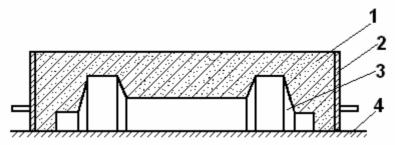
Manufacturing of mould bottom half: 1 – sand mix; 2 – flask; 3 – casting pattern; 4 – pattern plate
